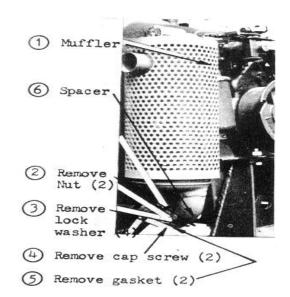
MUFFLER REMOVAL AND INSTALLATION
